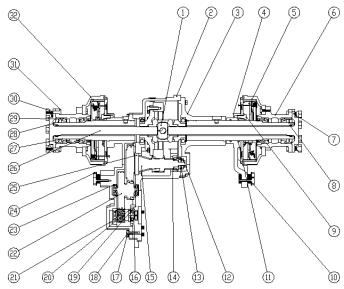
Gearbox & axle assembly (1-2.5t)
